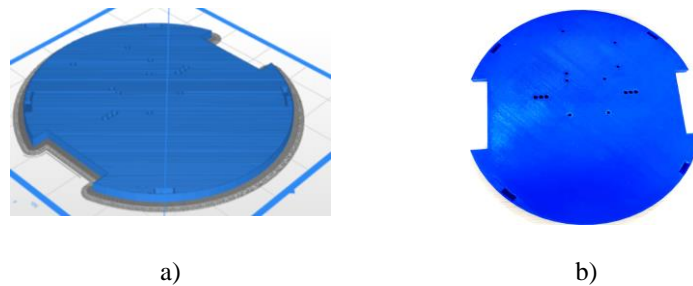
Bottom casing: a) part presentation on the printer, b) physically produced casing (finished product)
